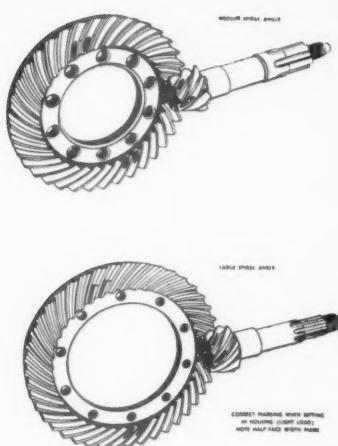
Line drawings of typical automobile spiral bevel gears, showing the desirable no-load contact marking.
